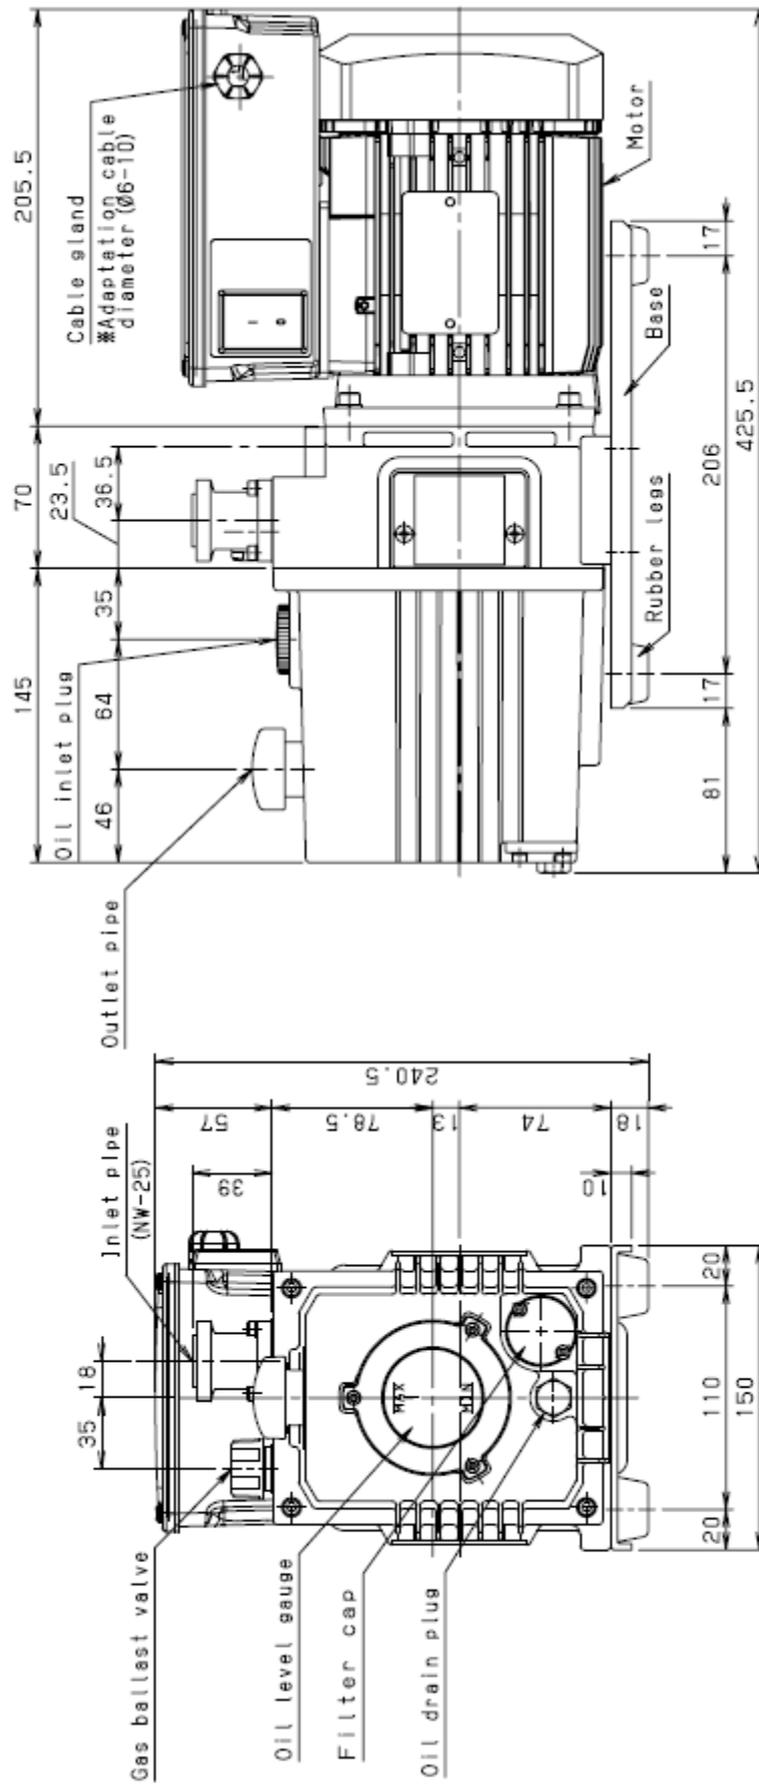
Dimensional drawing of GLD-040 oil sealed rotary vacuum pump
